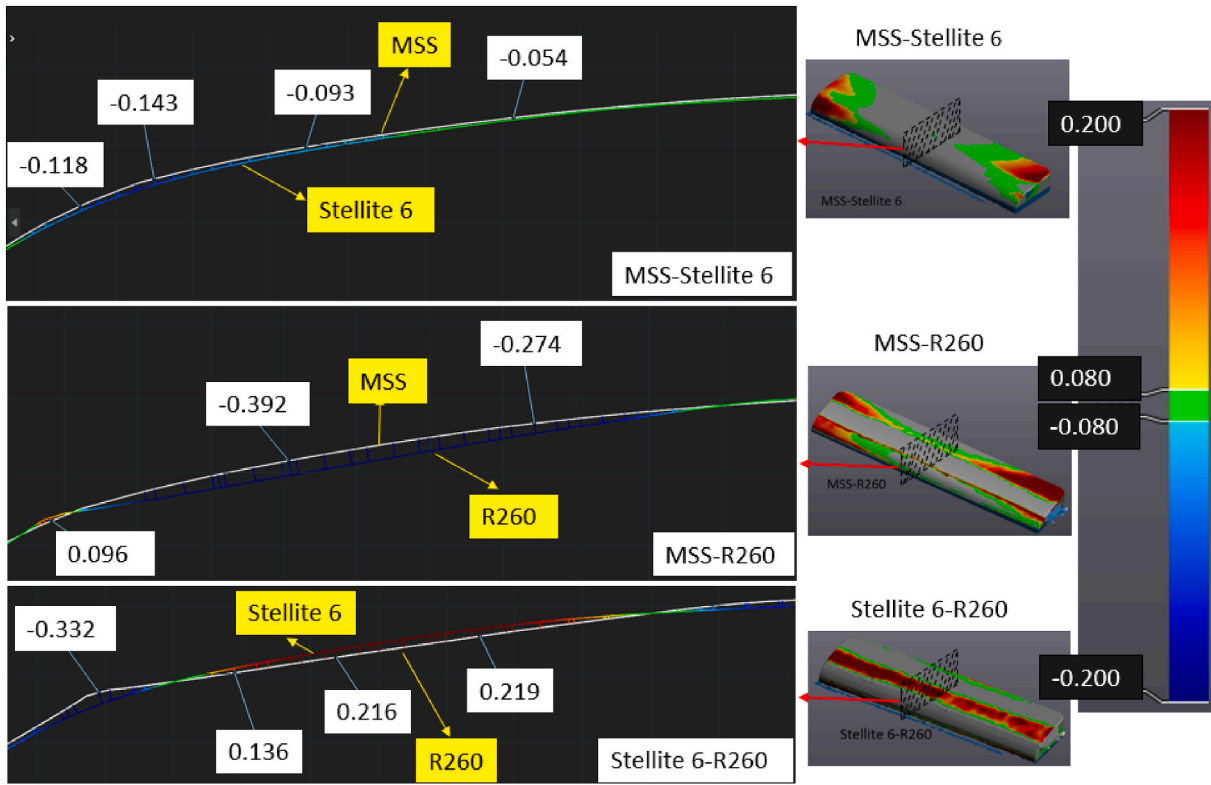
Full-scale test pocket specimen scans after the tests using a Creaform 3D Laser Scanner.
